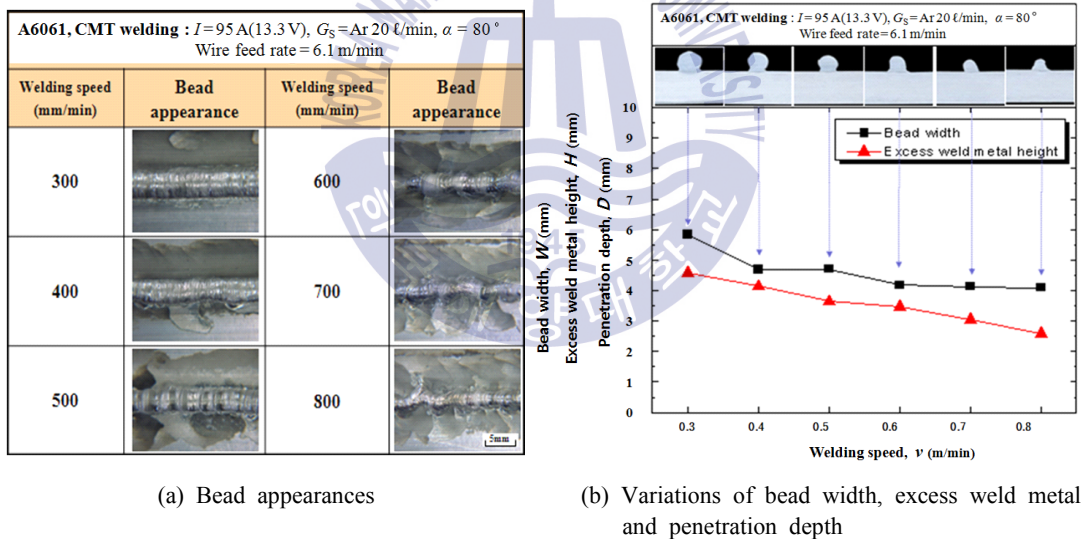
Welding characteristics with variant speed in CMT welding(A6061)
